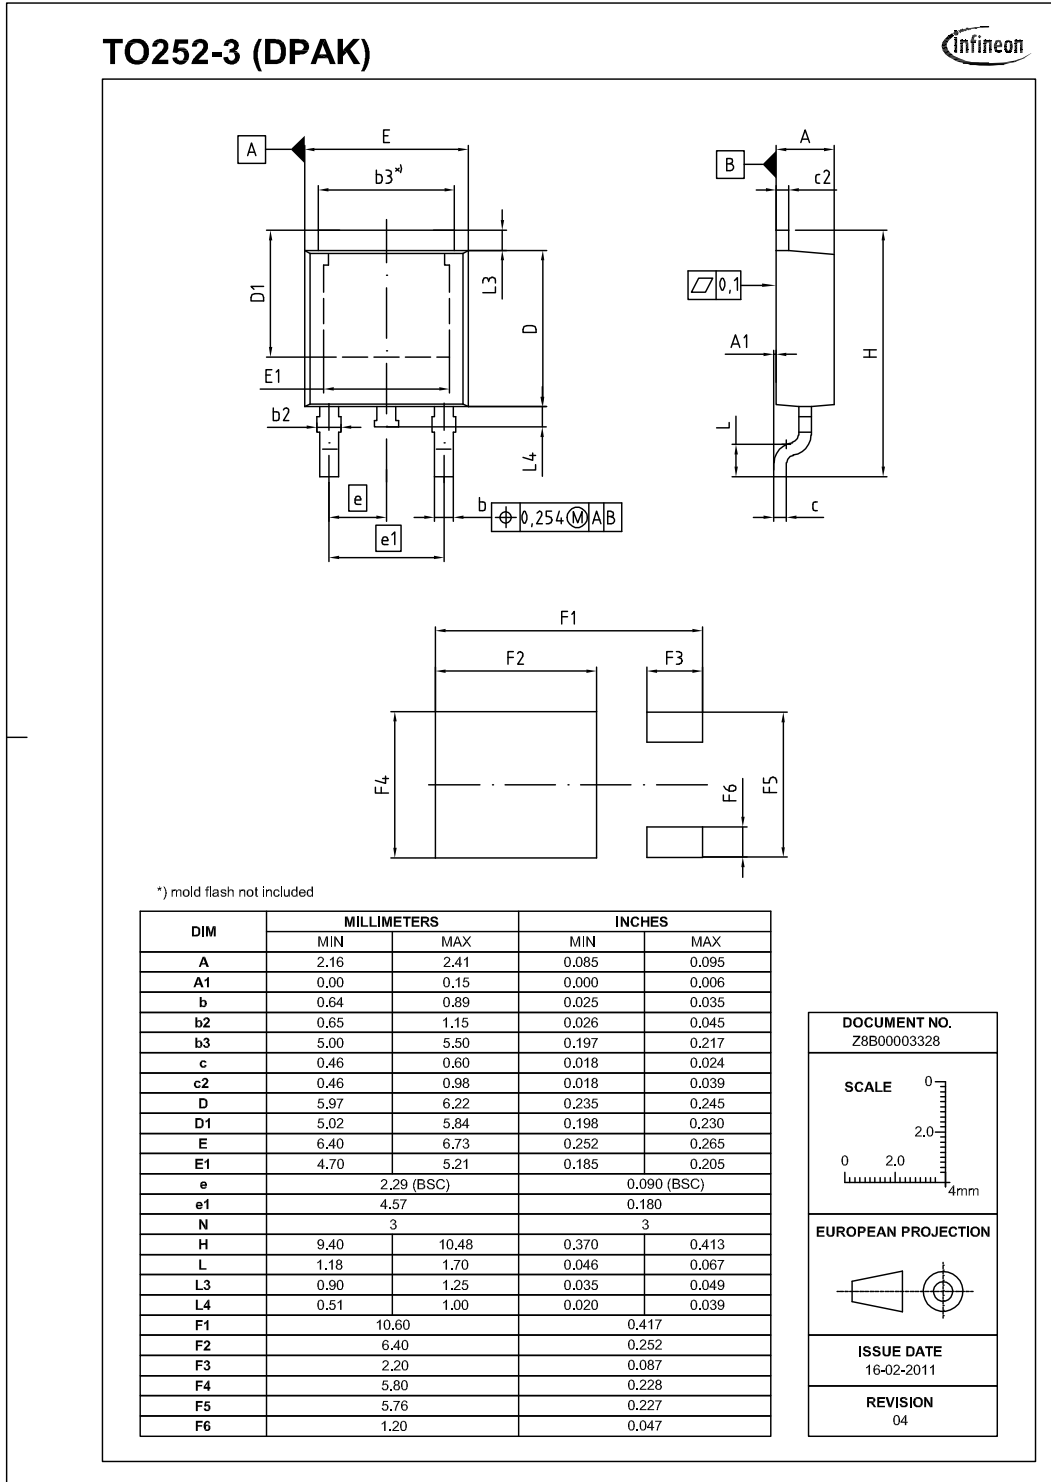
Outline PG-TO 252-3, dimensions in mm/inches
